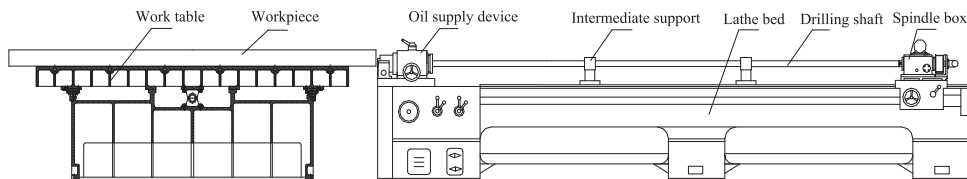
Configuration of deep hole drilling machine for non-rotary workpiece.
